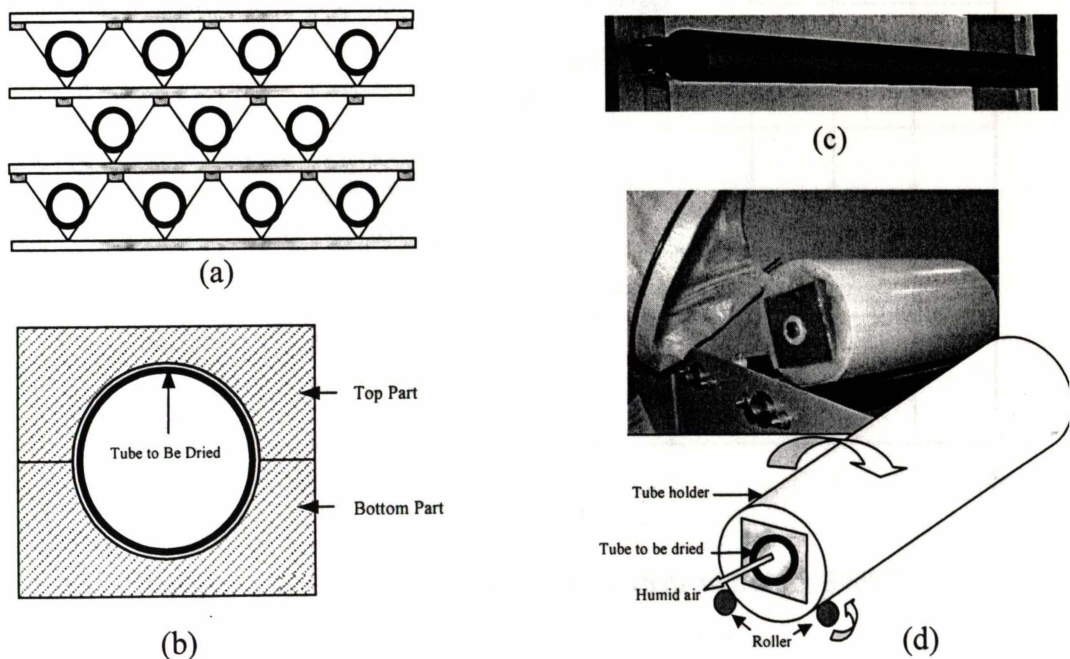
Tube Holders Developed: (a) V-Shape Tube Holder in Still Air, (b) C-shape Tube Holder with Moving Air, (c) Roller Drying in Air, (d) Rotating Tube Holders in Moving Air.
